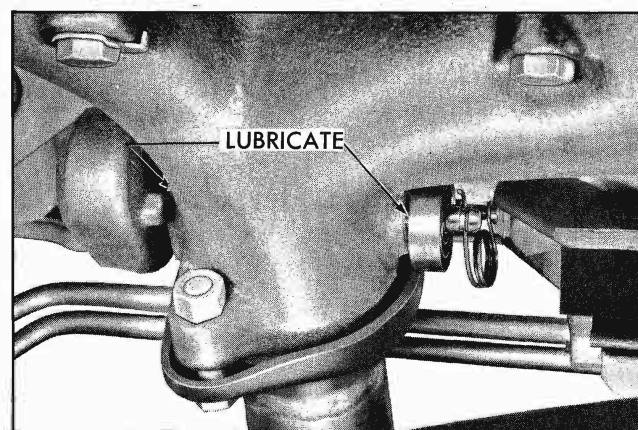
B-1 Heat Control Valve Thermostatic Spring and Counterweight
